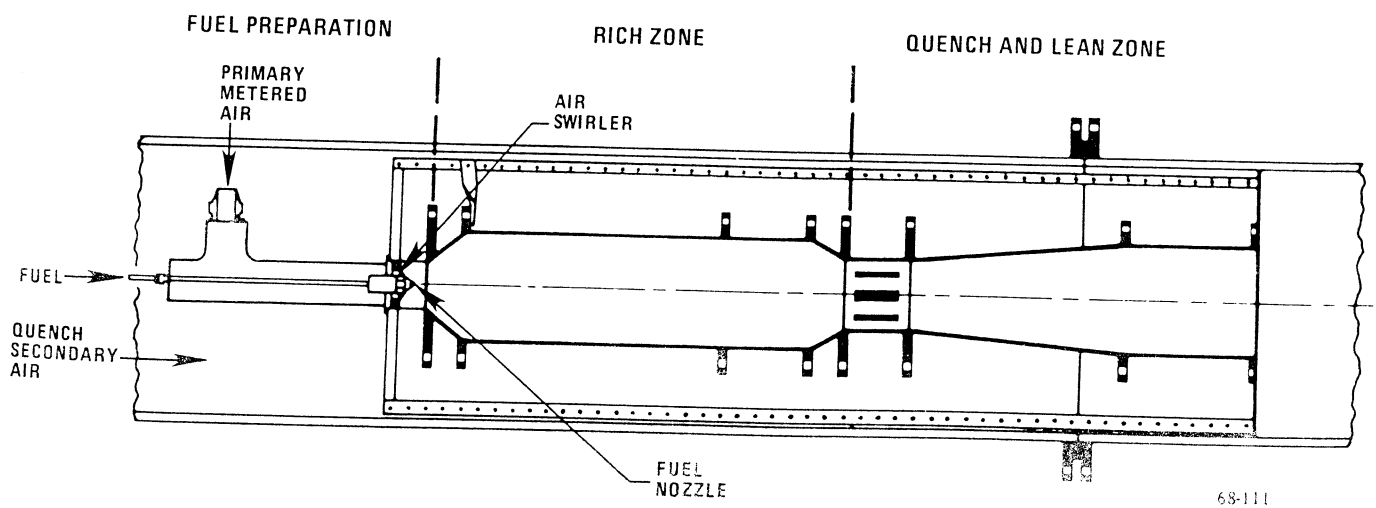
Configuration 1 - RBQQ Combustor with Recessed Air Swirler
